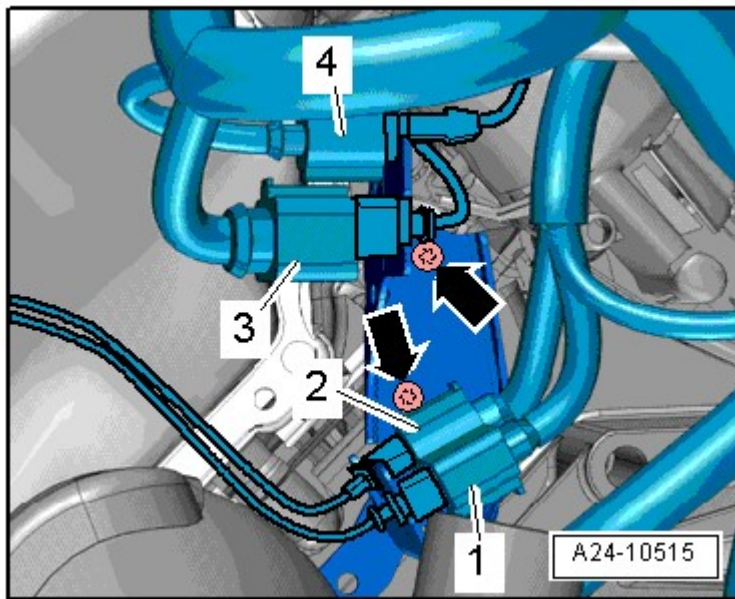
Cylinder Bank 2 Oxygen Sensor Electrical Connectors
